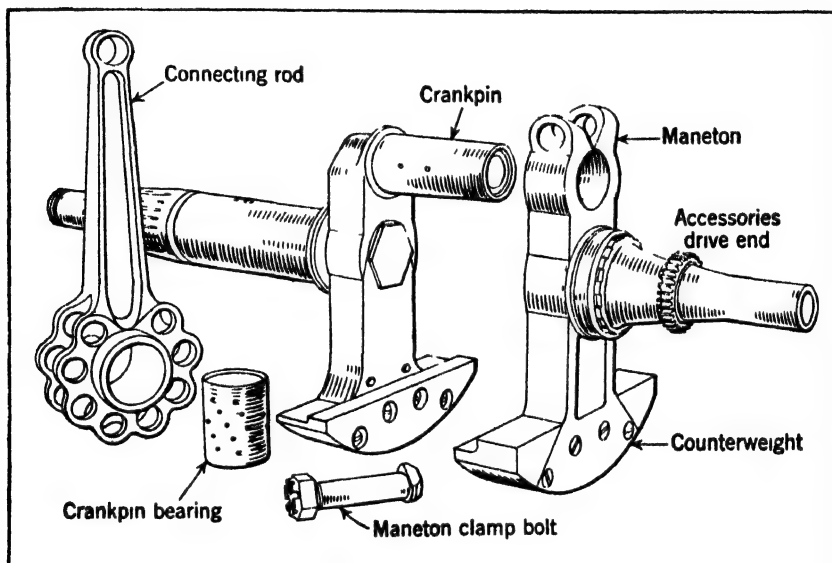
Master Connecting Rod and Crankshaft Parts of the Bristol Jupiter Nine-Cylinder Radial Air-Cooled Engine.
